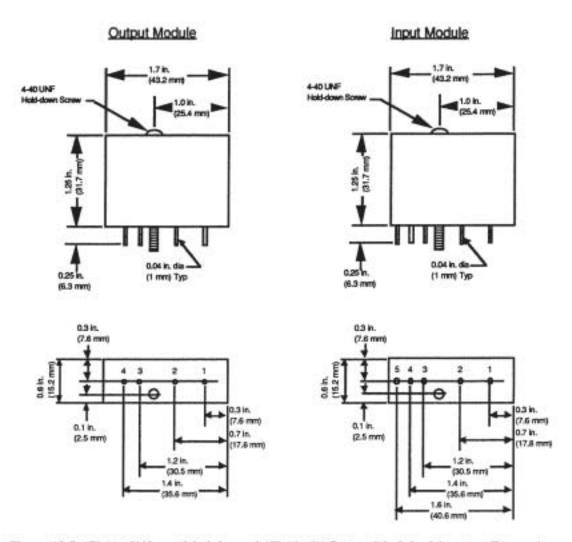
473.11c-0X Input Modules and 473.12c-0X Output Modules Mounting Dimensions
